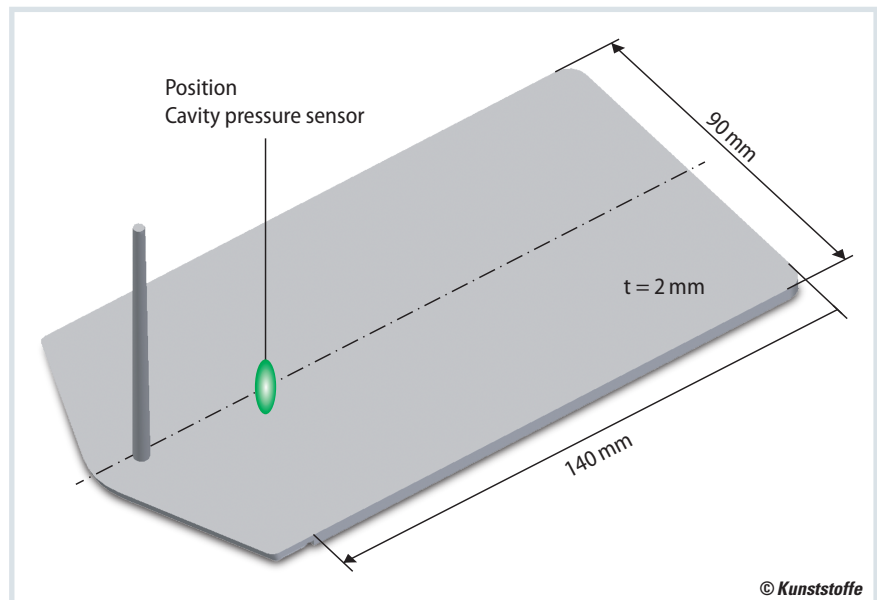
The parts were manufactured on an injection molding machine (type: Allrounder 370 A, manufacturer: Arburg GmbH + Co KG, Lossburg) using a polypropylene (grade: PP579 S; manufacturer: Sabic Deutschland GmbH, Düsseldorf) (source: IKV)
